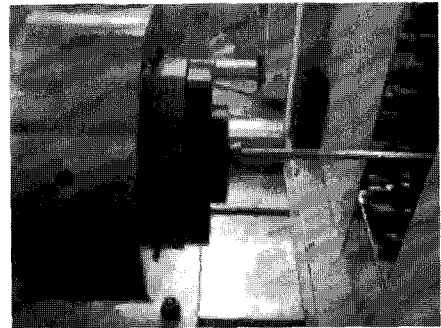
Photo of the o-ring fractured under 4300bar,
